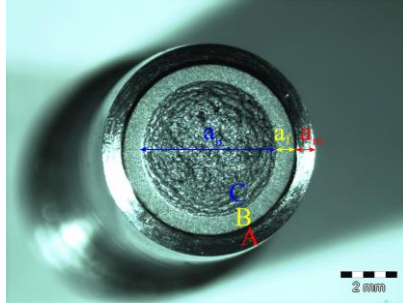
Image of the fracture surface of the specimen and defined dimensions
